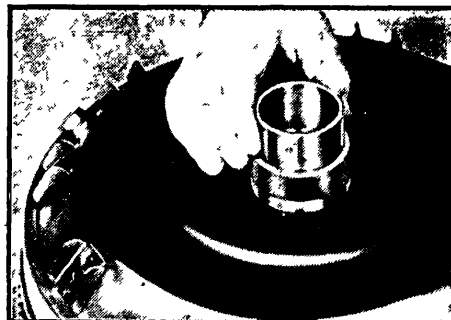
J Pushing seal ring off locators, using special pilot sleeve inside aligning tool, 1939-52 fluid drive
